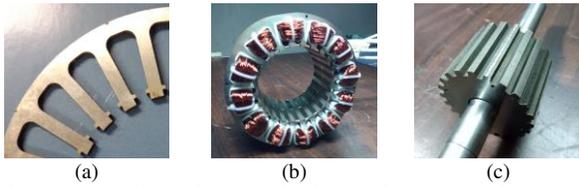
Prototype details. (a) Stator lamination. (b) Stator assembly. (c) Rotor.
